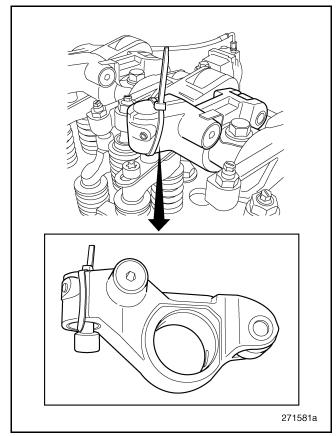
Tie Strap Holding Engine Brake Piston (MP7 Shown)
